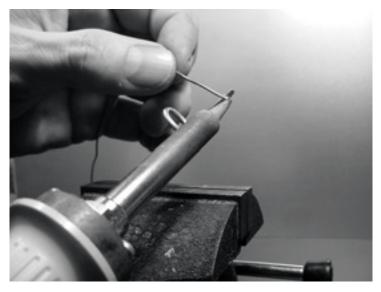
Add a little solder to the end of the wire to "tin" it prior to soldering.
